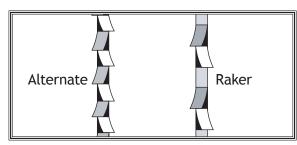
Typical woodcutting bandsaw blade tooth sets.
